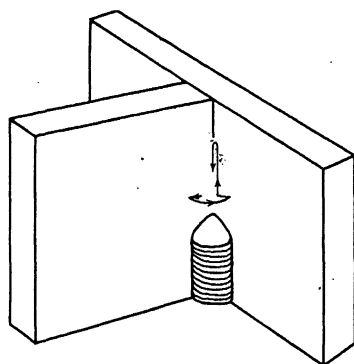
Movement of electrode in making a vertical fillet weld.
